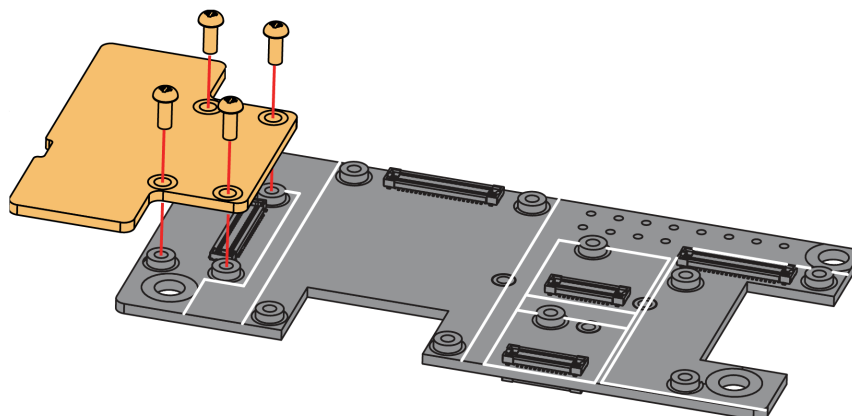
WisBlock Power Slot on the RAK19010 Base Board
